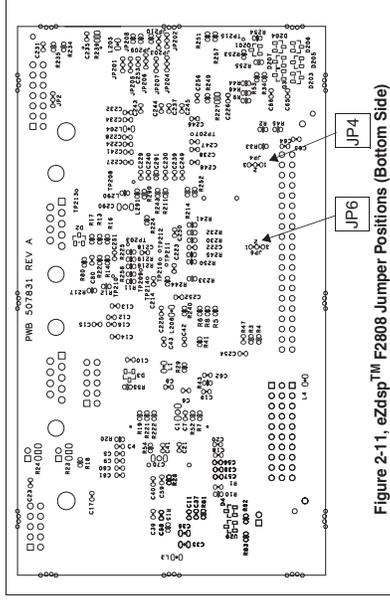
, eZdsp™ F2808 Jumper Positions (Bottom Side)
